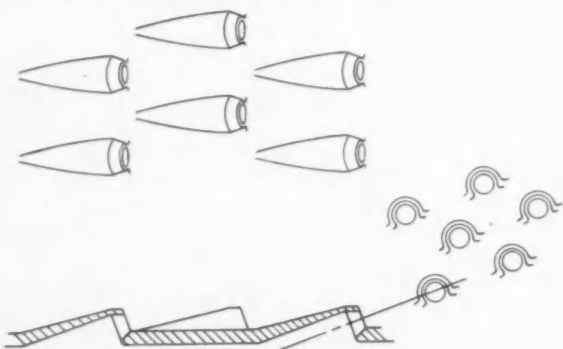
Thrust-producing small nozzles in surface of cylindrical silencer.
